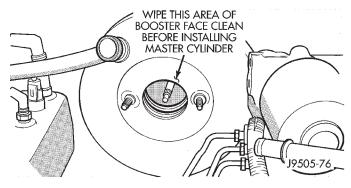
Cylinder Mounting Surface Of Brake Booster
